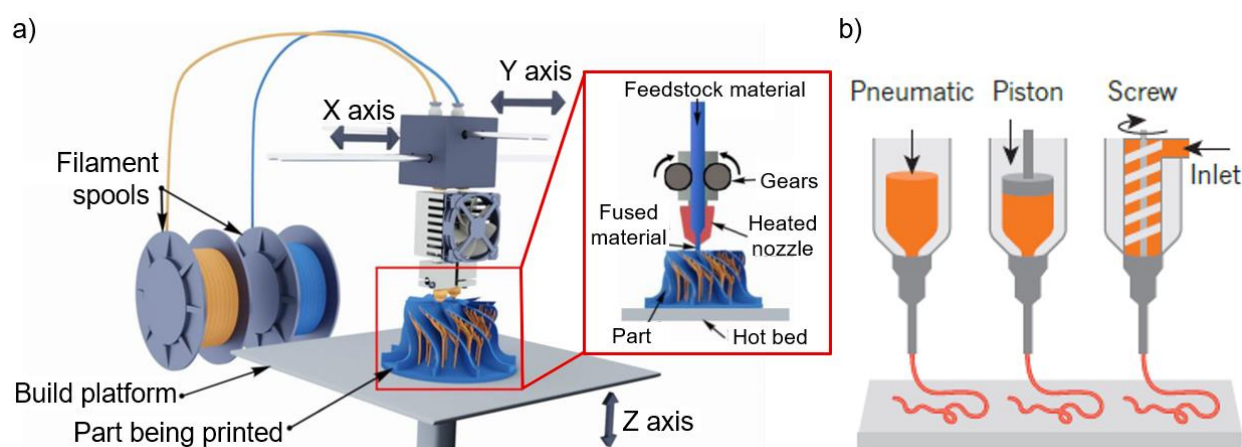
a) Schematic of the FFF process. A thermoplastic filament is melted and extruded by a heated nozzle using a gear mechanism. Adapted from [24]. b) Schematic of the DIW process. The ink is extruded under pressure at room temperature using a pneumatic pressure, a piston, or an endless screw. Adapted from [25].
